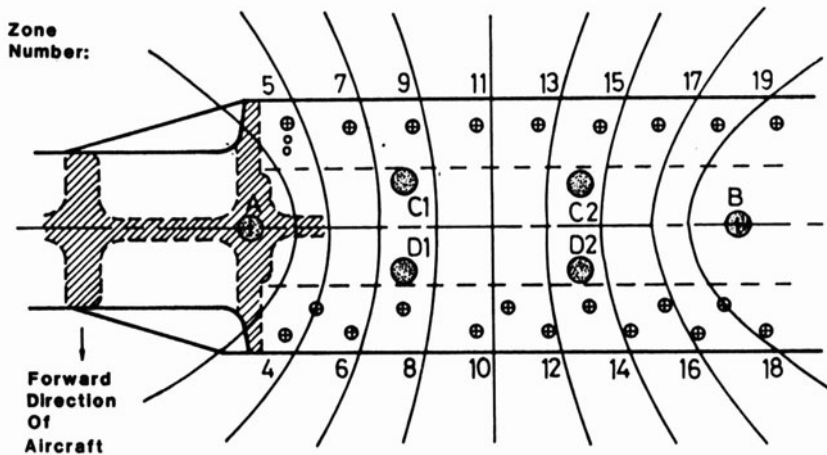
Lower surface of bottom flange of Mirage wing RH56 showing
